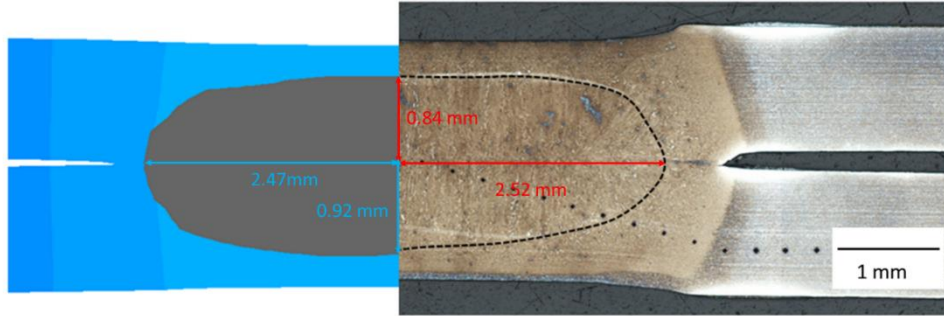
Weld nugget size from numerical prediction and experiment measurement with welding current of 6 kA
